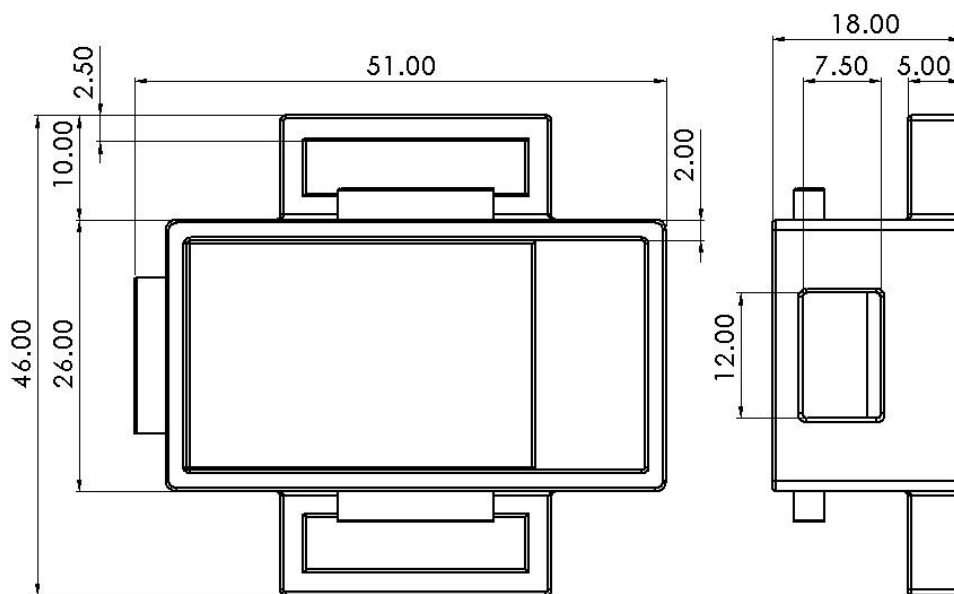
Sensor's casing main dimensions, all dimensions are given in millimeters
